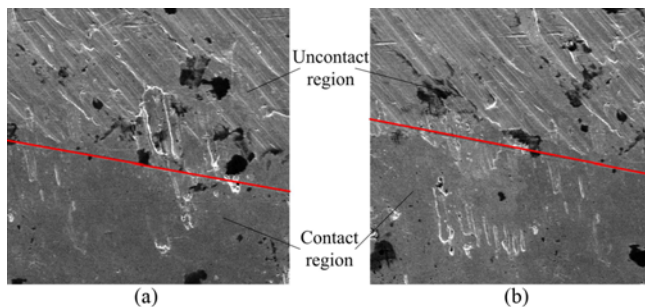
Surface topography of pinion with: (a) no assembly errors; (b) assembly errors
